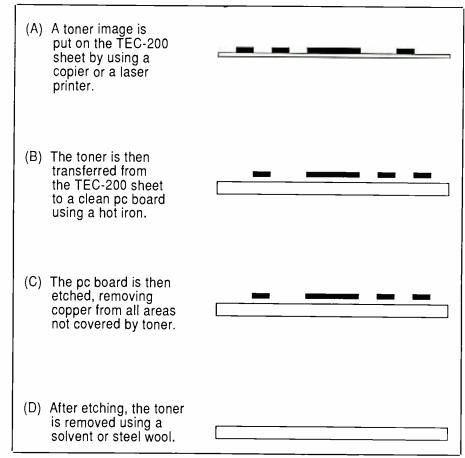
How TEC-200 sheets simplify hacker fabrication of pc boards.
